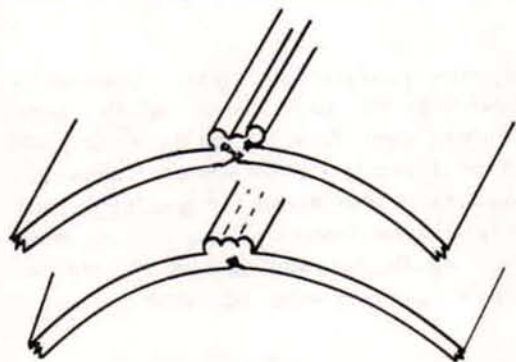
The butt weld in the top drawing will not hold. This can be caused by insufficient heat or welding too fast. The weld shown at the bottom will hold.
